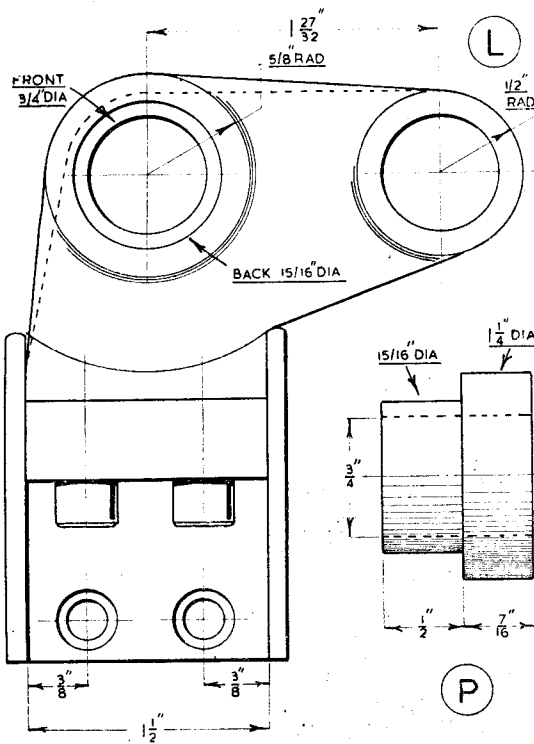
The headstock assembly—L, and the drive shaft rear bearing bush—P.
